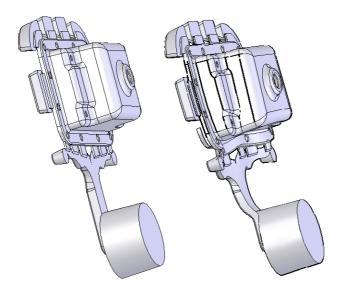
Left: Undistorted runner system and dimensionally accurate casting. Right: Distorted runner and bent casting with dimensional inaccuracy. Bending due to a stuck cold chamber die casting tablet.
